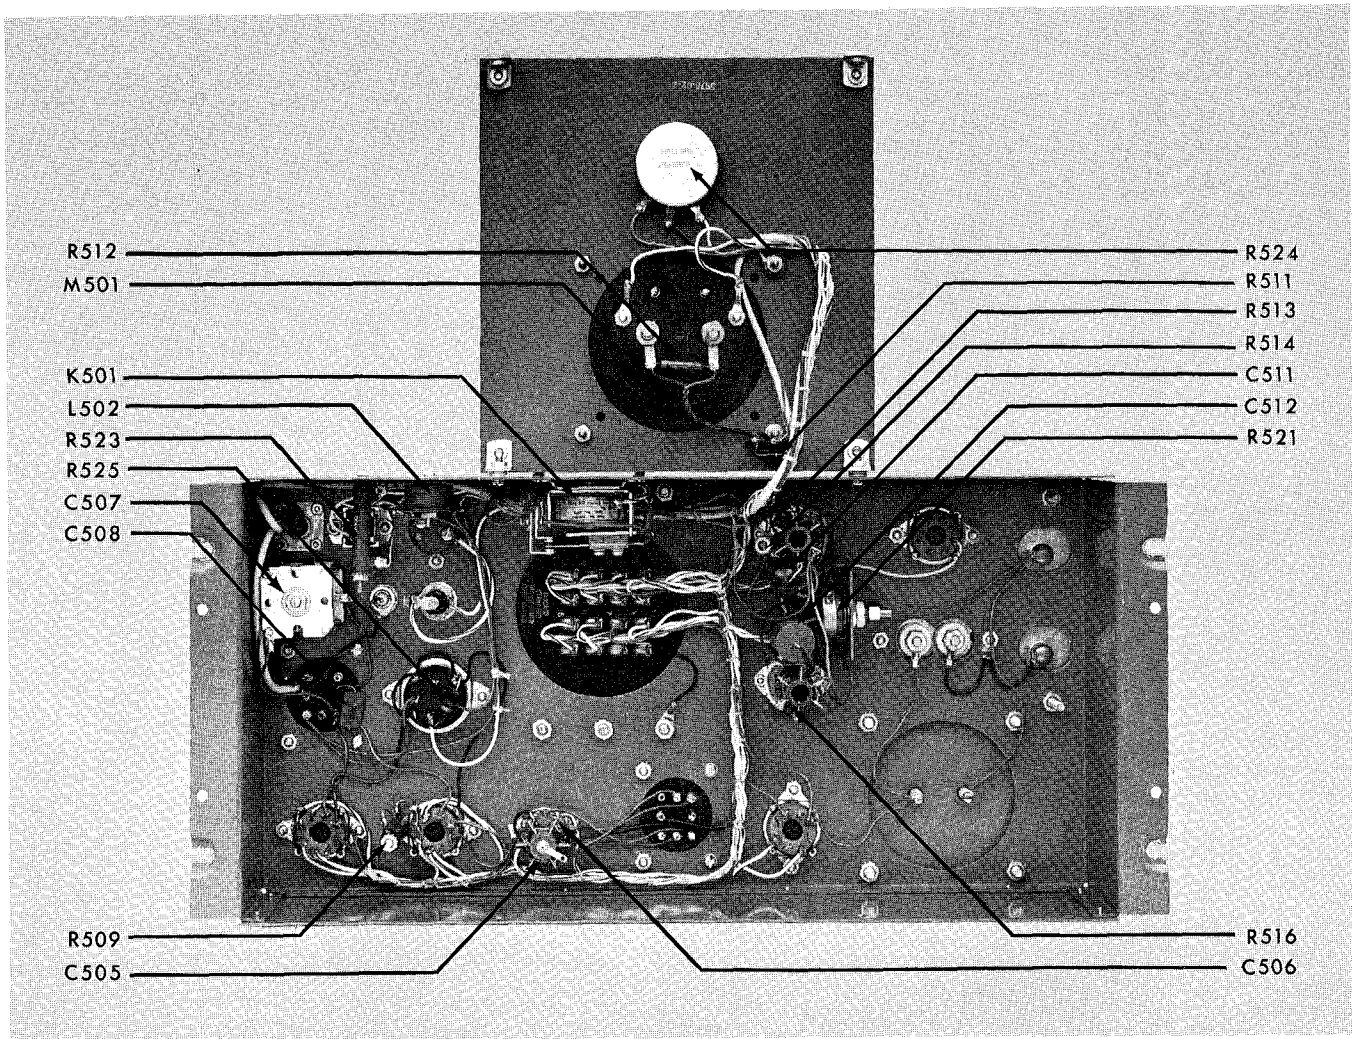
MASTER BIAS OSCILLATOR PARTS LOCATION (INTERIOR VIEW)
